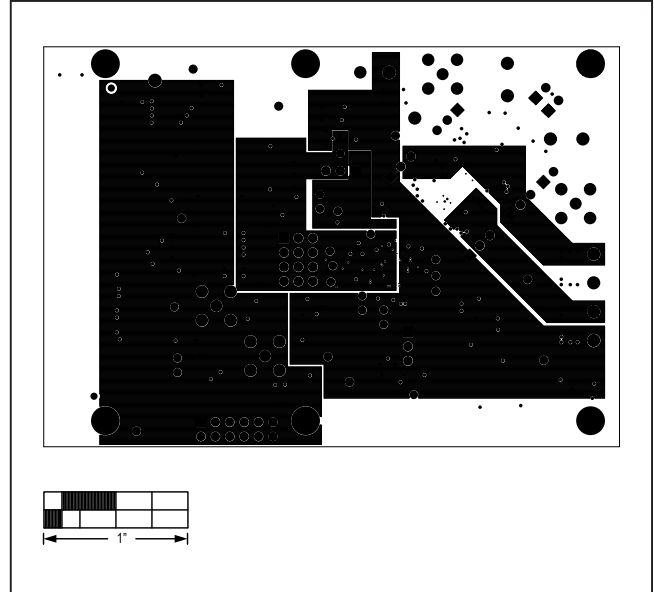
MAX11905 Differential EV Kit PCB Layout—Layer 3
